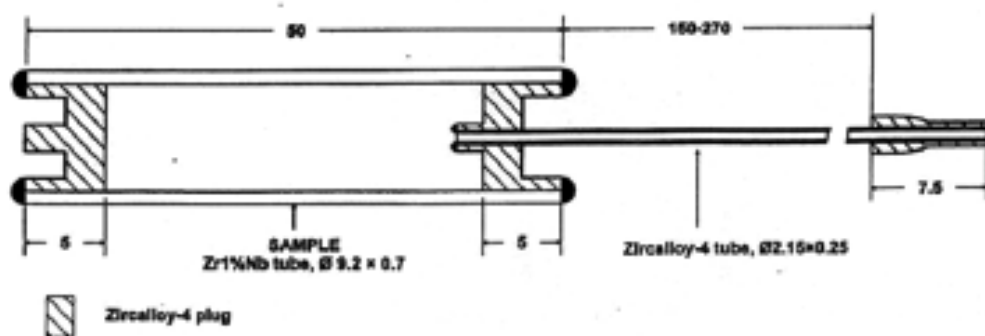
Drawing of the tube specimen for single-rod ballooning tests performed at AEKI [72].
